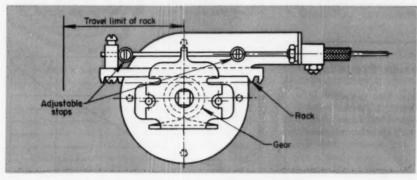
Rack and gear provide rotary output motion. The cable end moves in a straight path.
